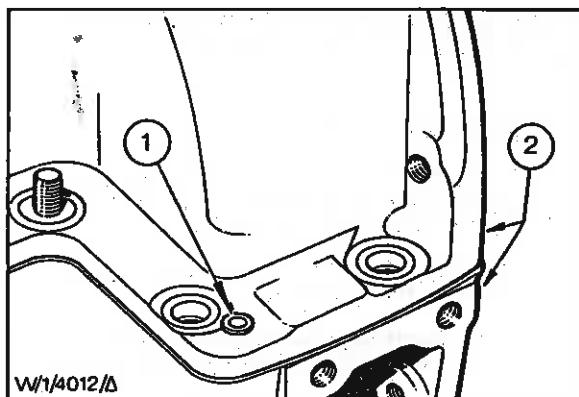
Oil Pan Rear Alignment - 2728T Engines
